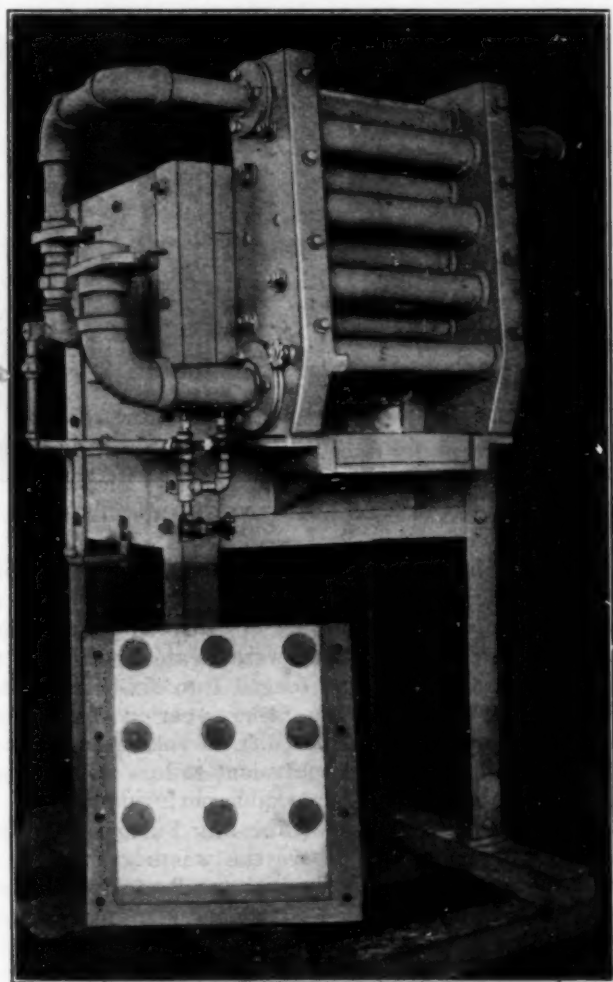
W. S. ROCKWELL CO.'S "ECONOMIZER FORGE" (FRONT REMOVED)
